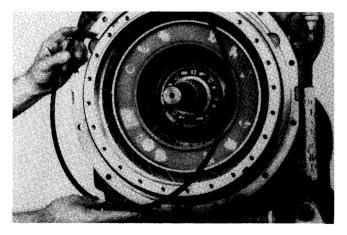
Position oil baffle in housing. Secure with oil baffle retainer ring, being sure ring is in full position in ring groove.
